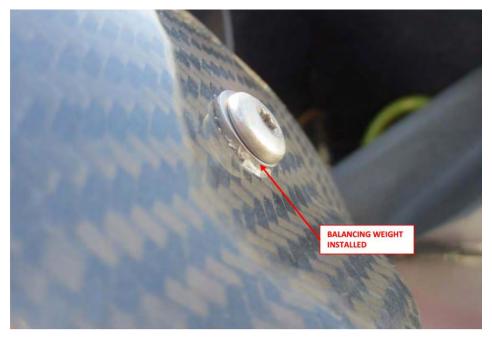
BALANCING WEIGHT (WASHER) INSTALLED ON SPINNER DOME
